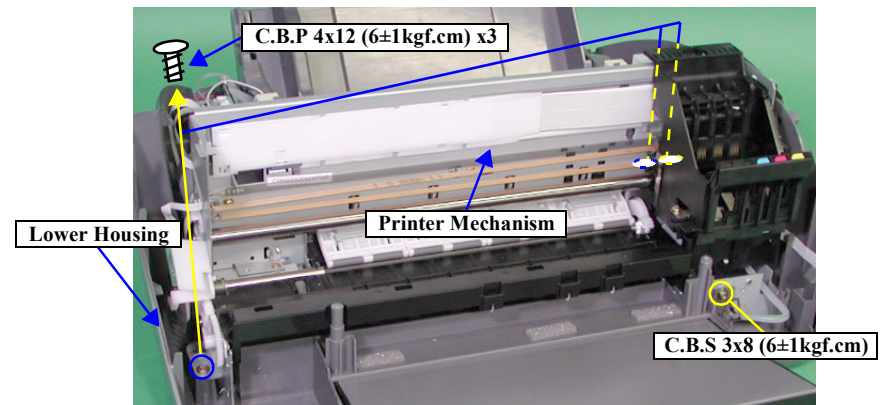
Lower Housing/Printer Mechanism Removal 1
